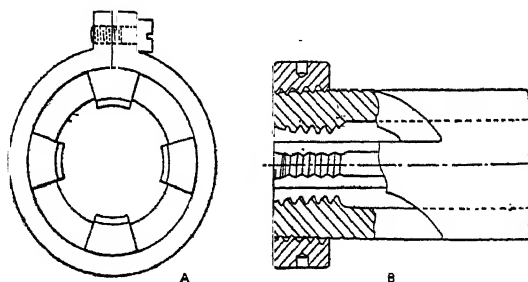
Adjustable tap in which different-size chasers can be placed.
